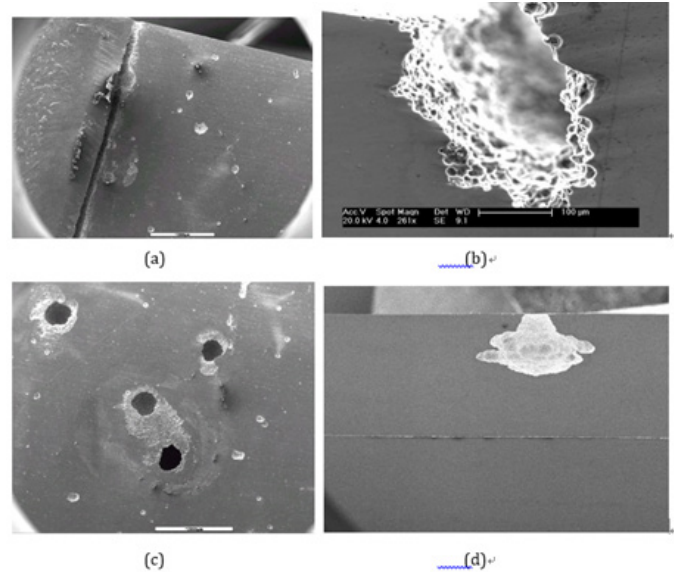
Top and cross-sectional views of: ((a), (b)) the knife-like attack at the weld edges; and ((c), (d)) severe pitting attack at the parent metal of the AA5754 at plasma butt weld after 24 hours of room temperature immersion in an acidified/chloride solution.
